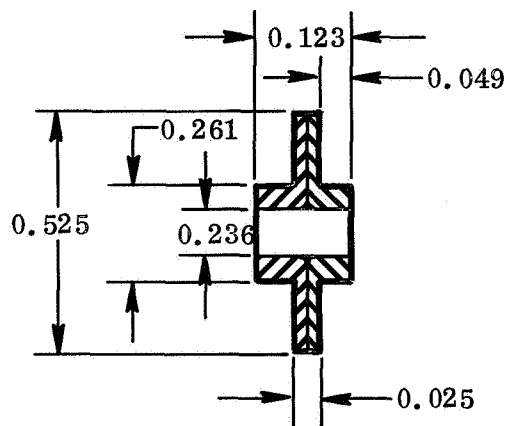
Two single hub pole pieces formed by drawing the hubs to replace the machined pole pieces above.
